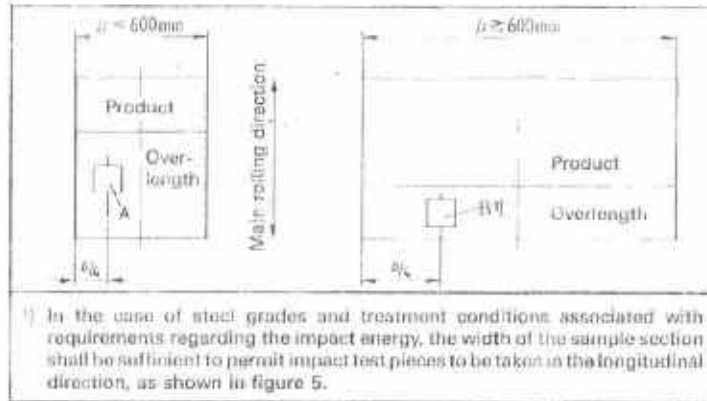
Location of sample sections (A or B) in the case of flat products with width b smaller than 600 mm and b not less than 600 mm
